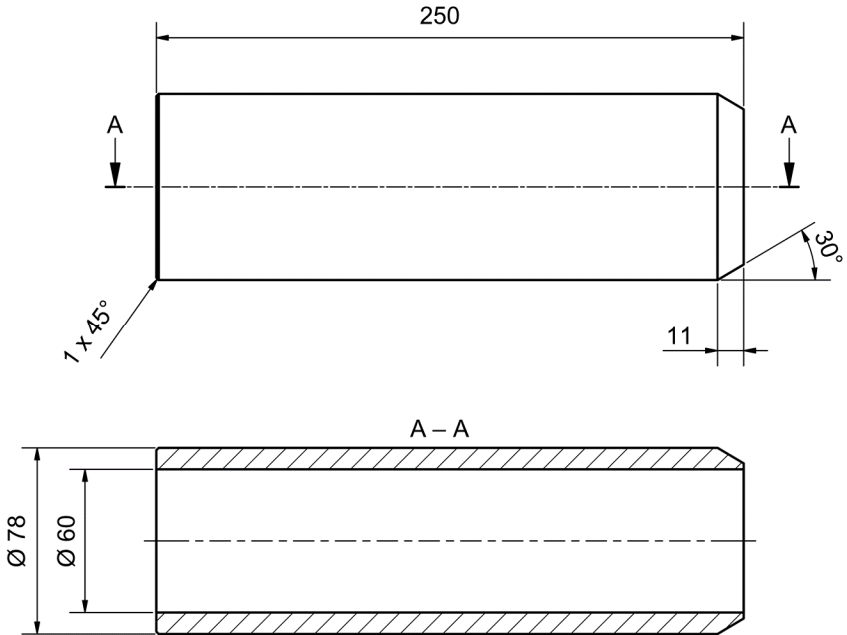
Technical drawing of the specimen geometry of the BTA deep drilled specimens
